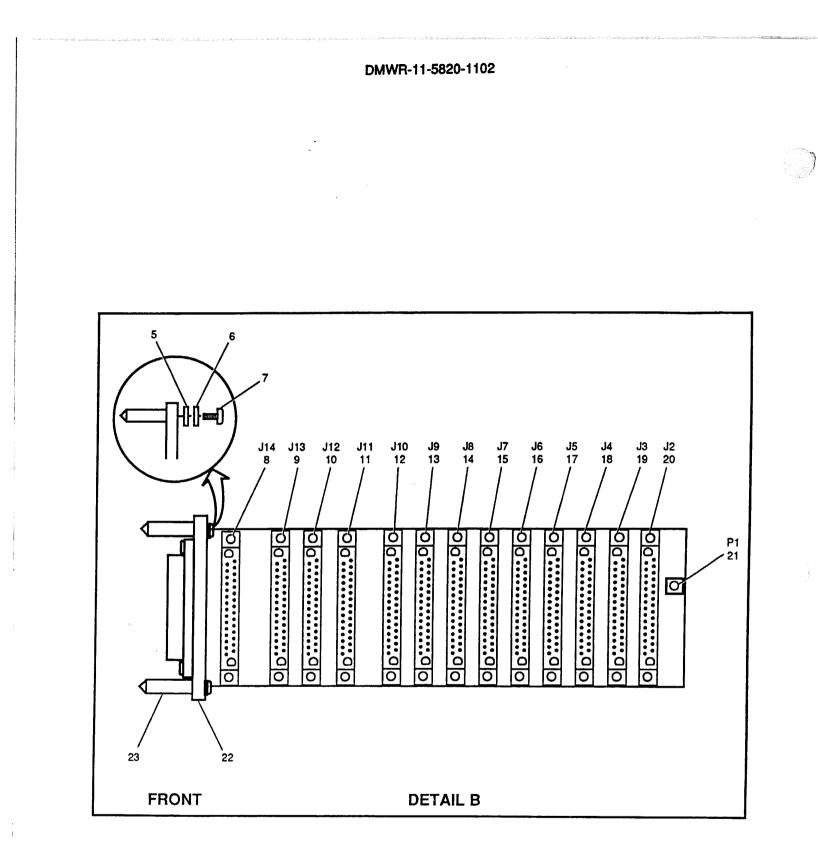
A14 Interconnect Board Assembly (Sheet 2 of 3)
